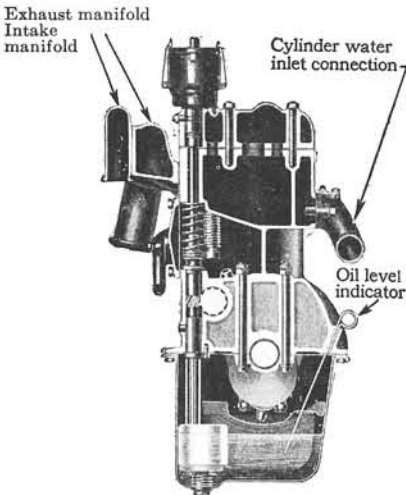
Sectional end view of engine showing how the oil pump (also distributor) is driven by a gear on the camshaft. The oil level indicator is also shown.
